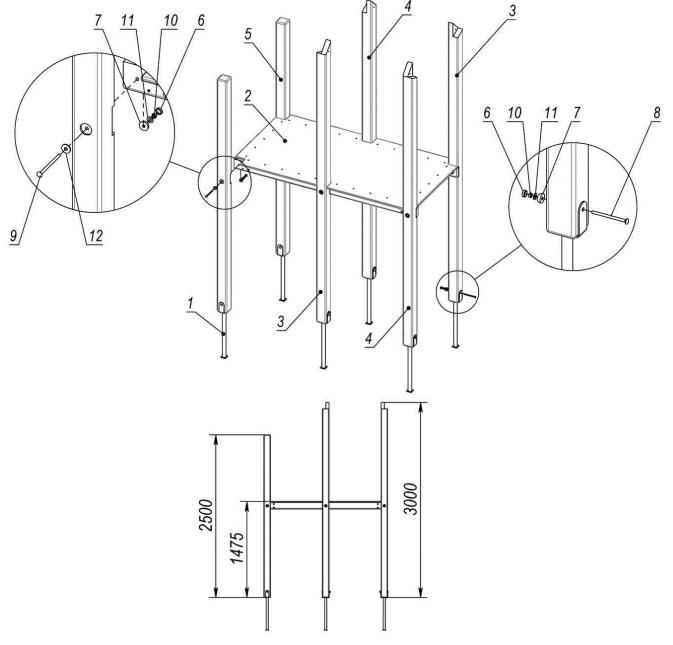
Assembly scheme of the multi-level tower. (Additional assembly scheme is in the Appendix)
